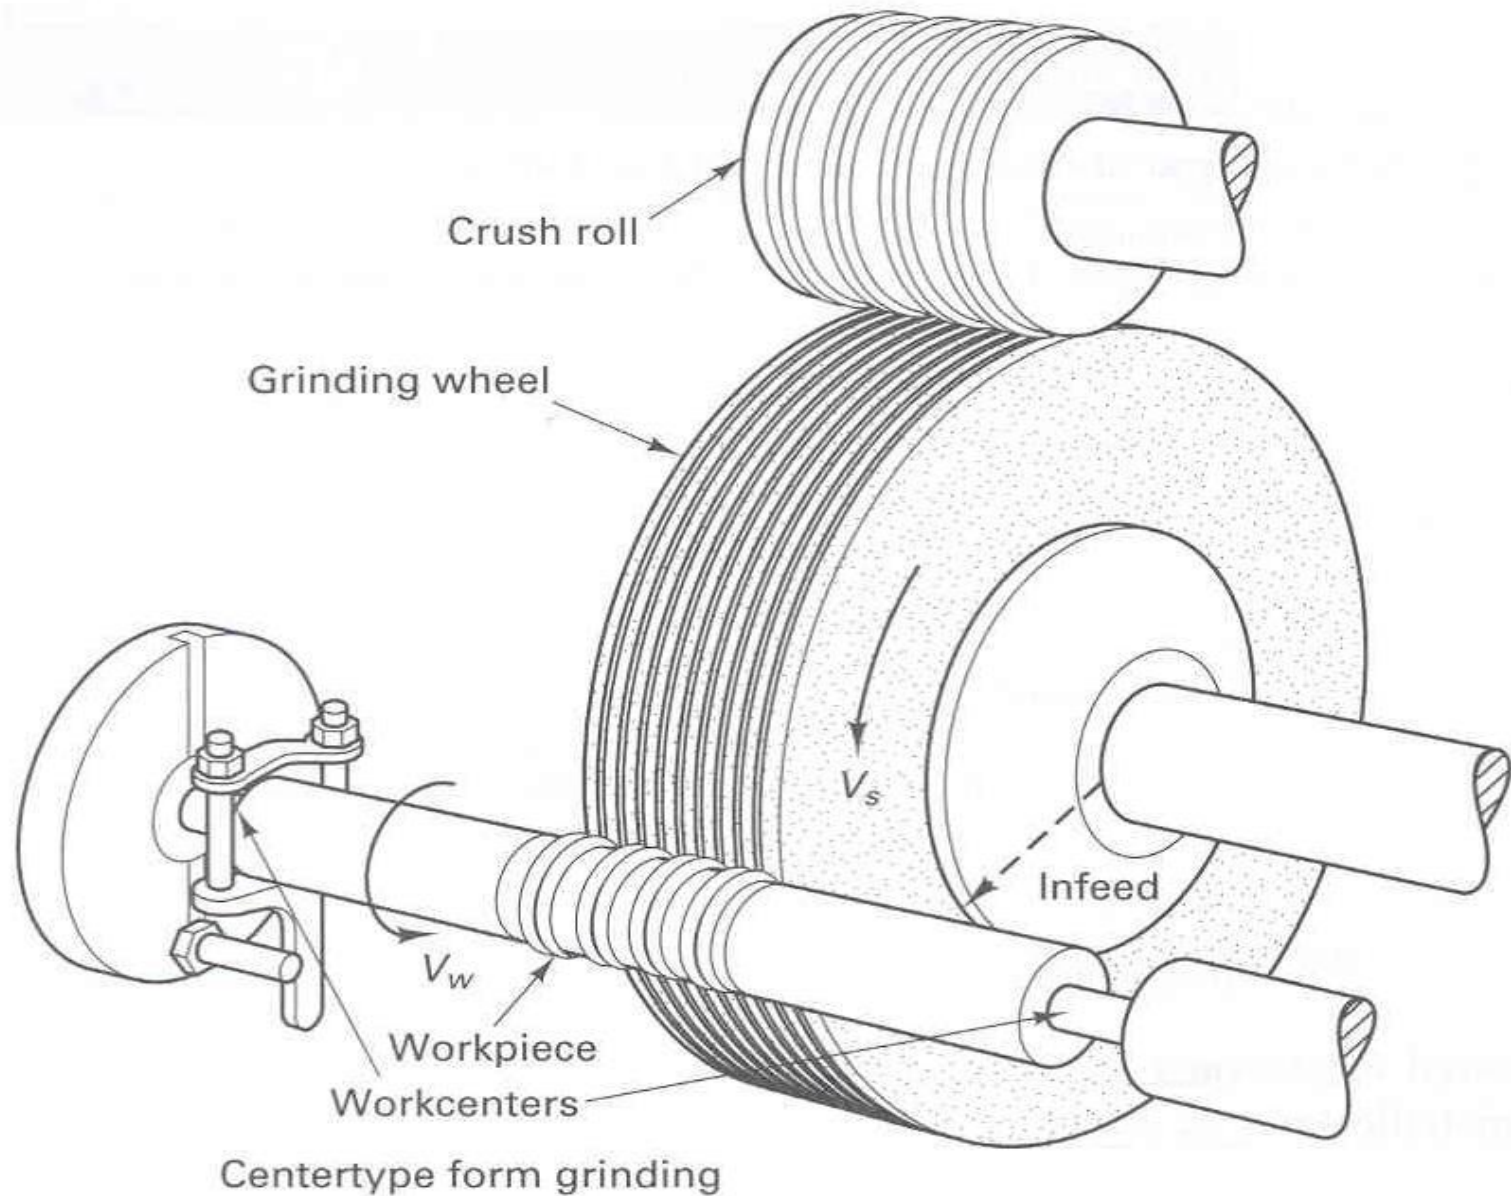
Plunge cut grinding of cylinder held between centers. Note that crush roll dressing is shown.
